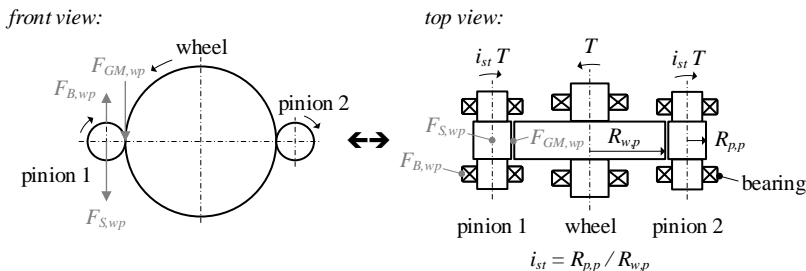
Torque and forces at wheel-two-pinion gear assembly
